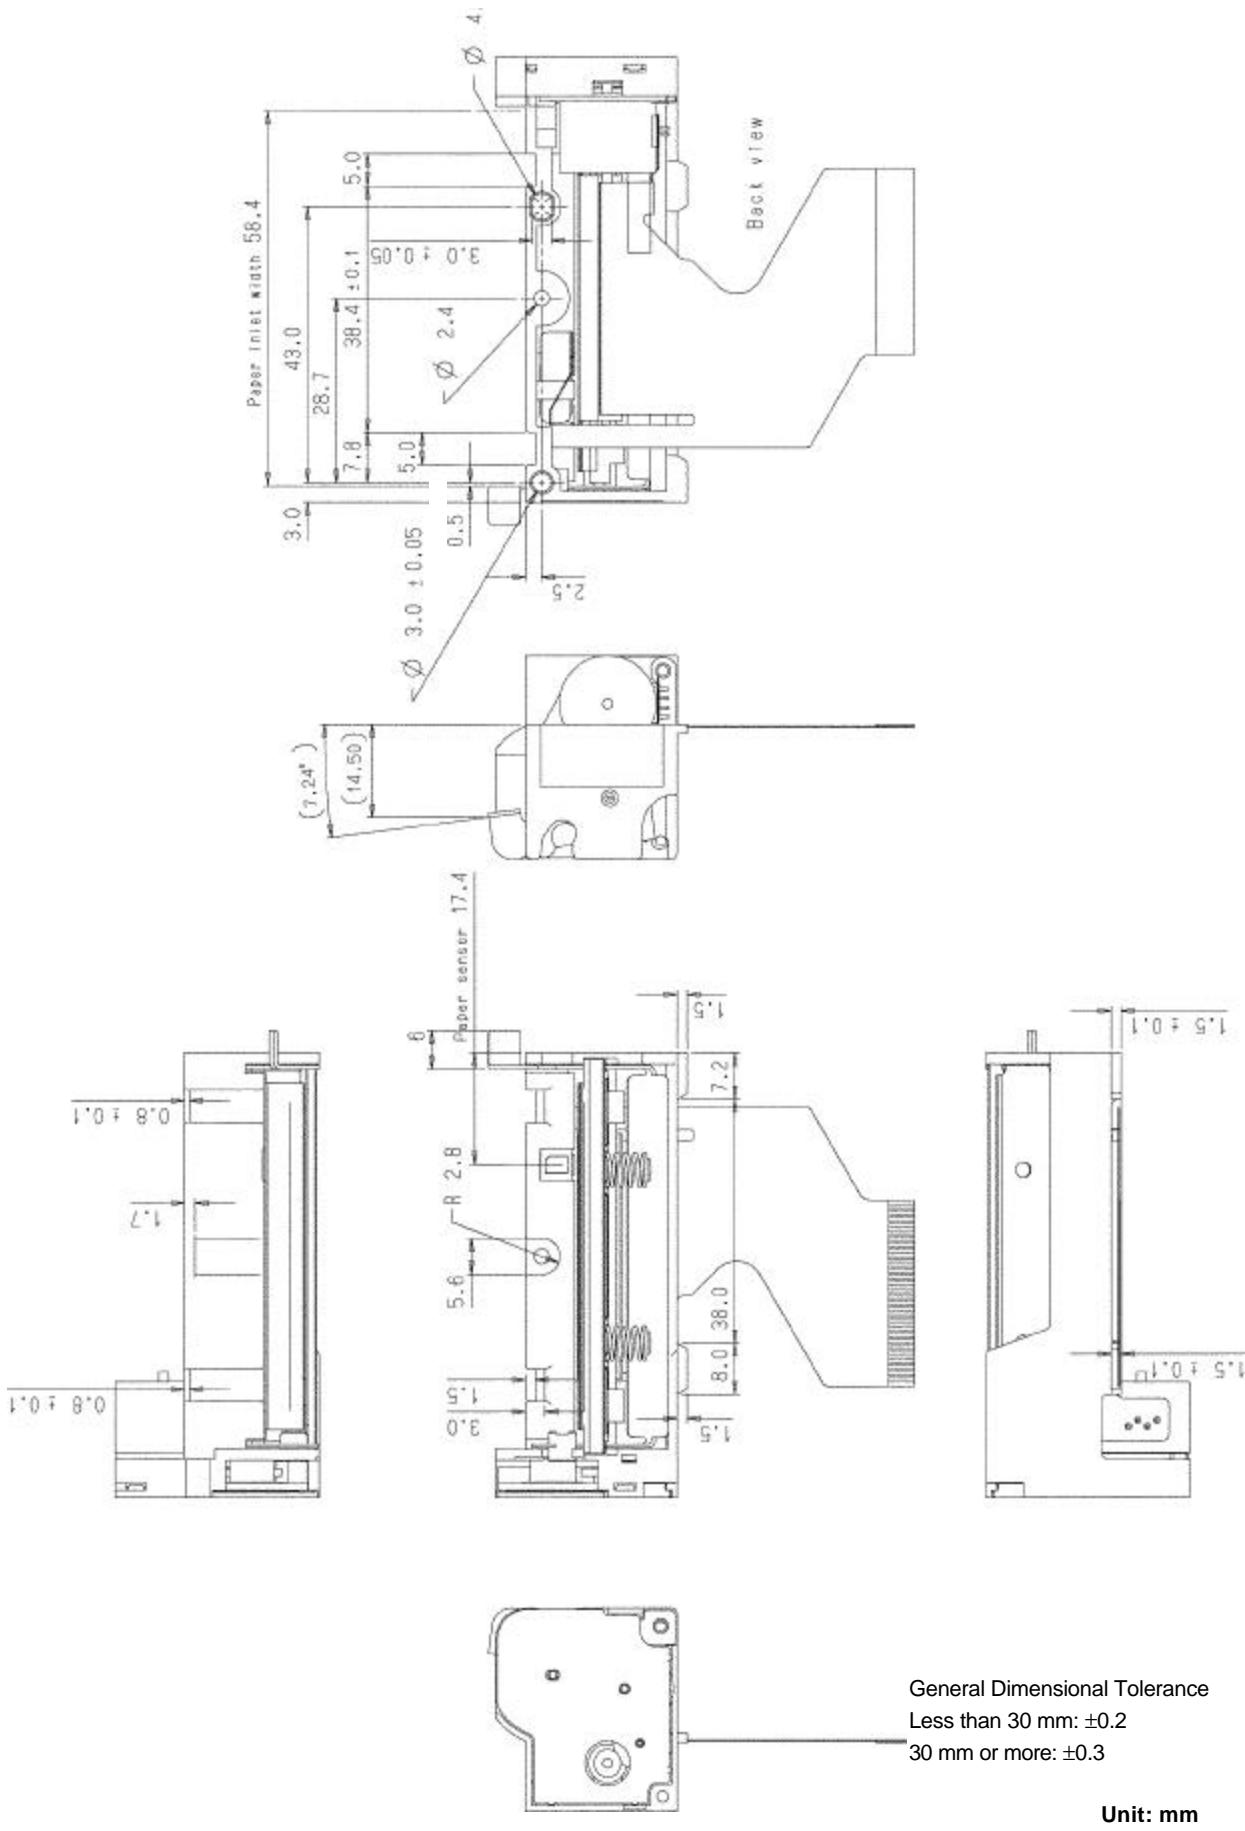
LTPA245C Printer Main Body Appearance and Dimensions
